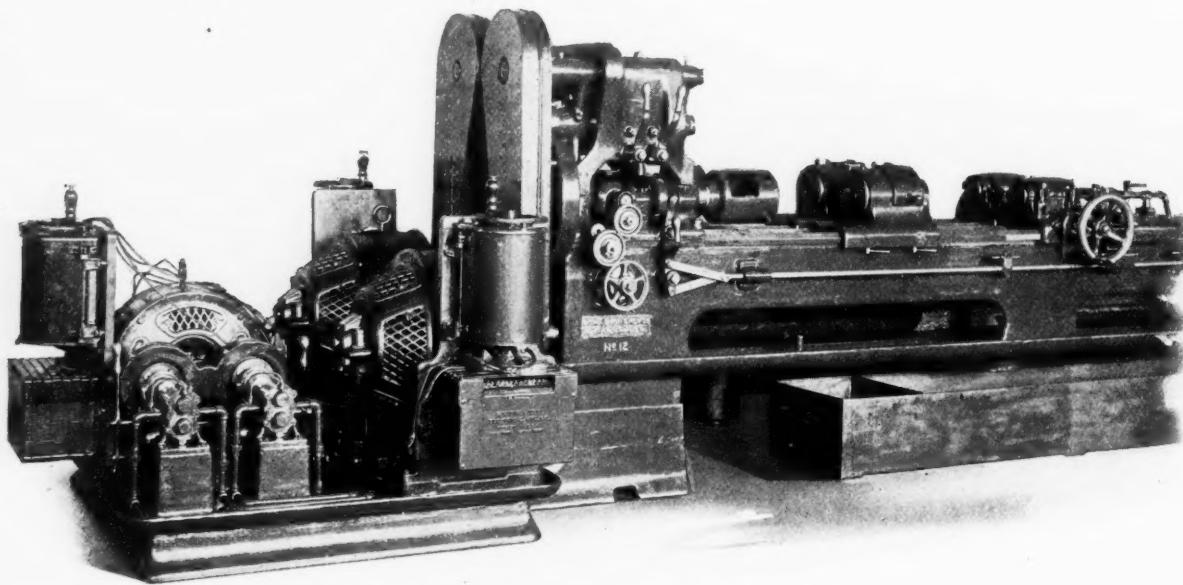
Large, Motor-driven, Pratt & Whitney Gun Barrel Drilling Machine.
